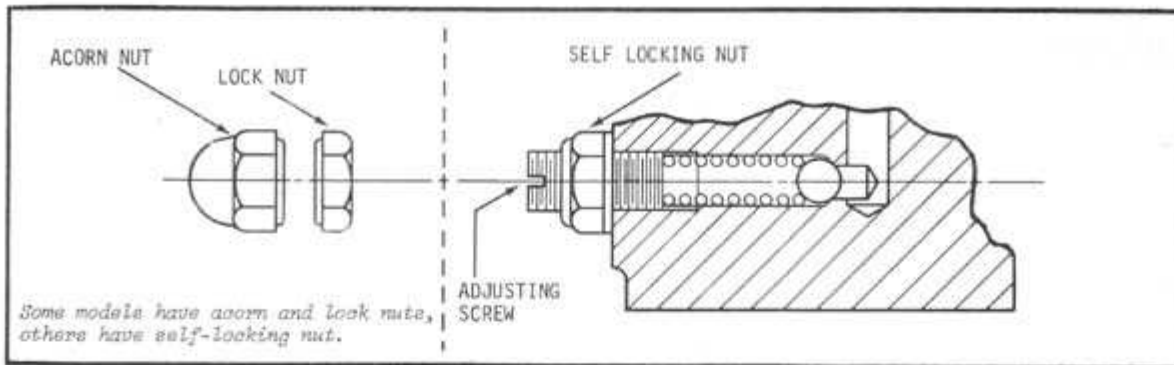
OIL PRESSURE RELIEF VALVE AND ADJUSTMENT
